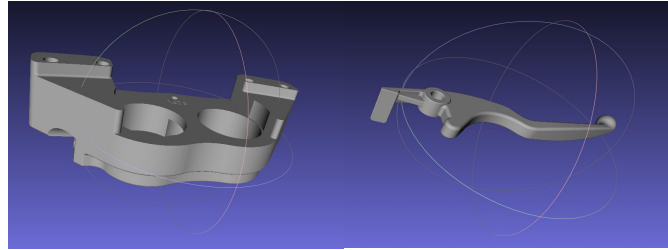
Scanned Geometry of a Car Brake Caliper and Lever Brake.
